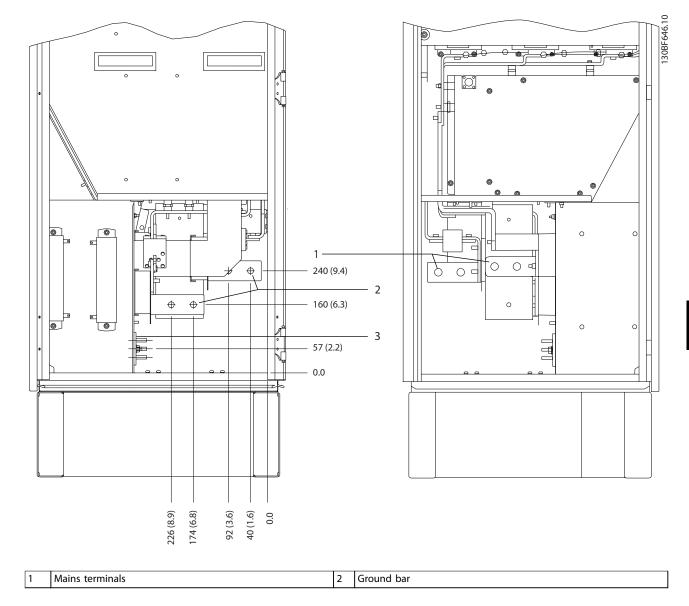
Terminal Dimensions for F10–F13 Rectifier Cabinet, Side View
